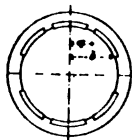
Main bearing, section of brasses fitted with white metal.
